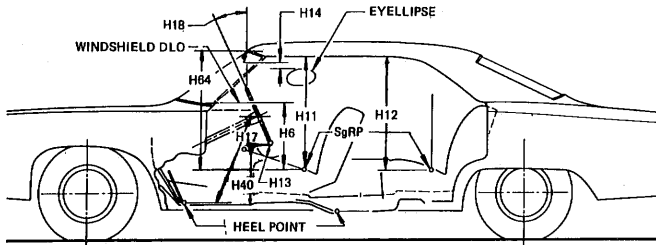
INTERIOR DIMENSIONS, HEIGHT
